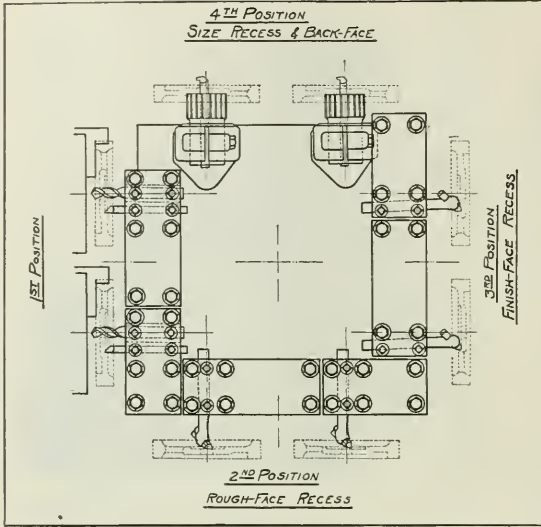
Tooling used on a Double-spindle Flat Turret Lathe for producing a Camshaft Gear
